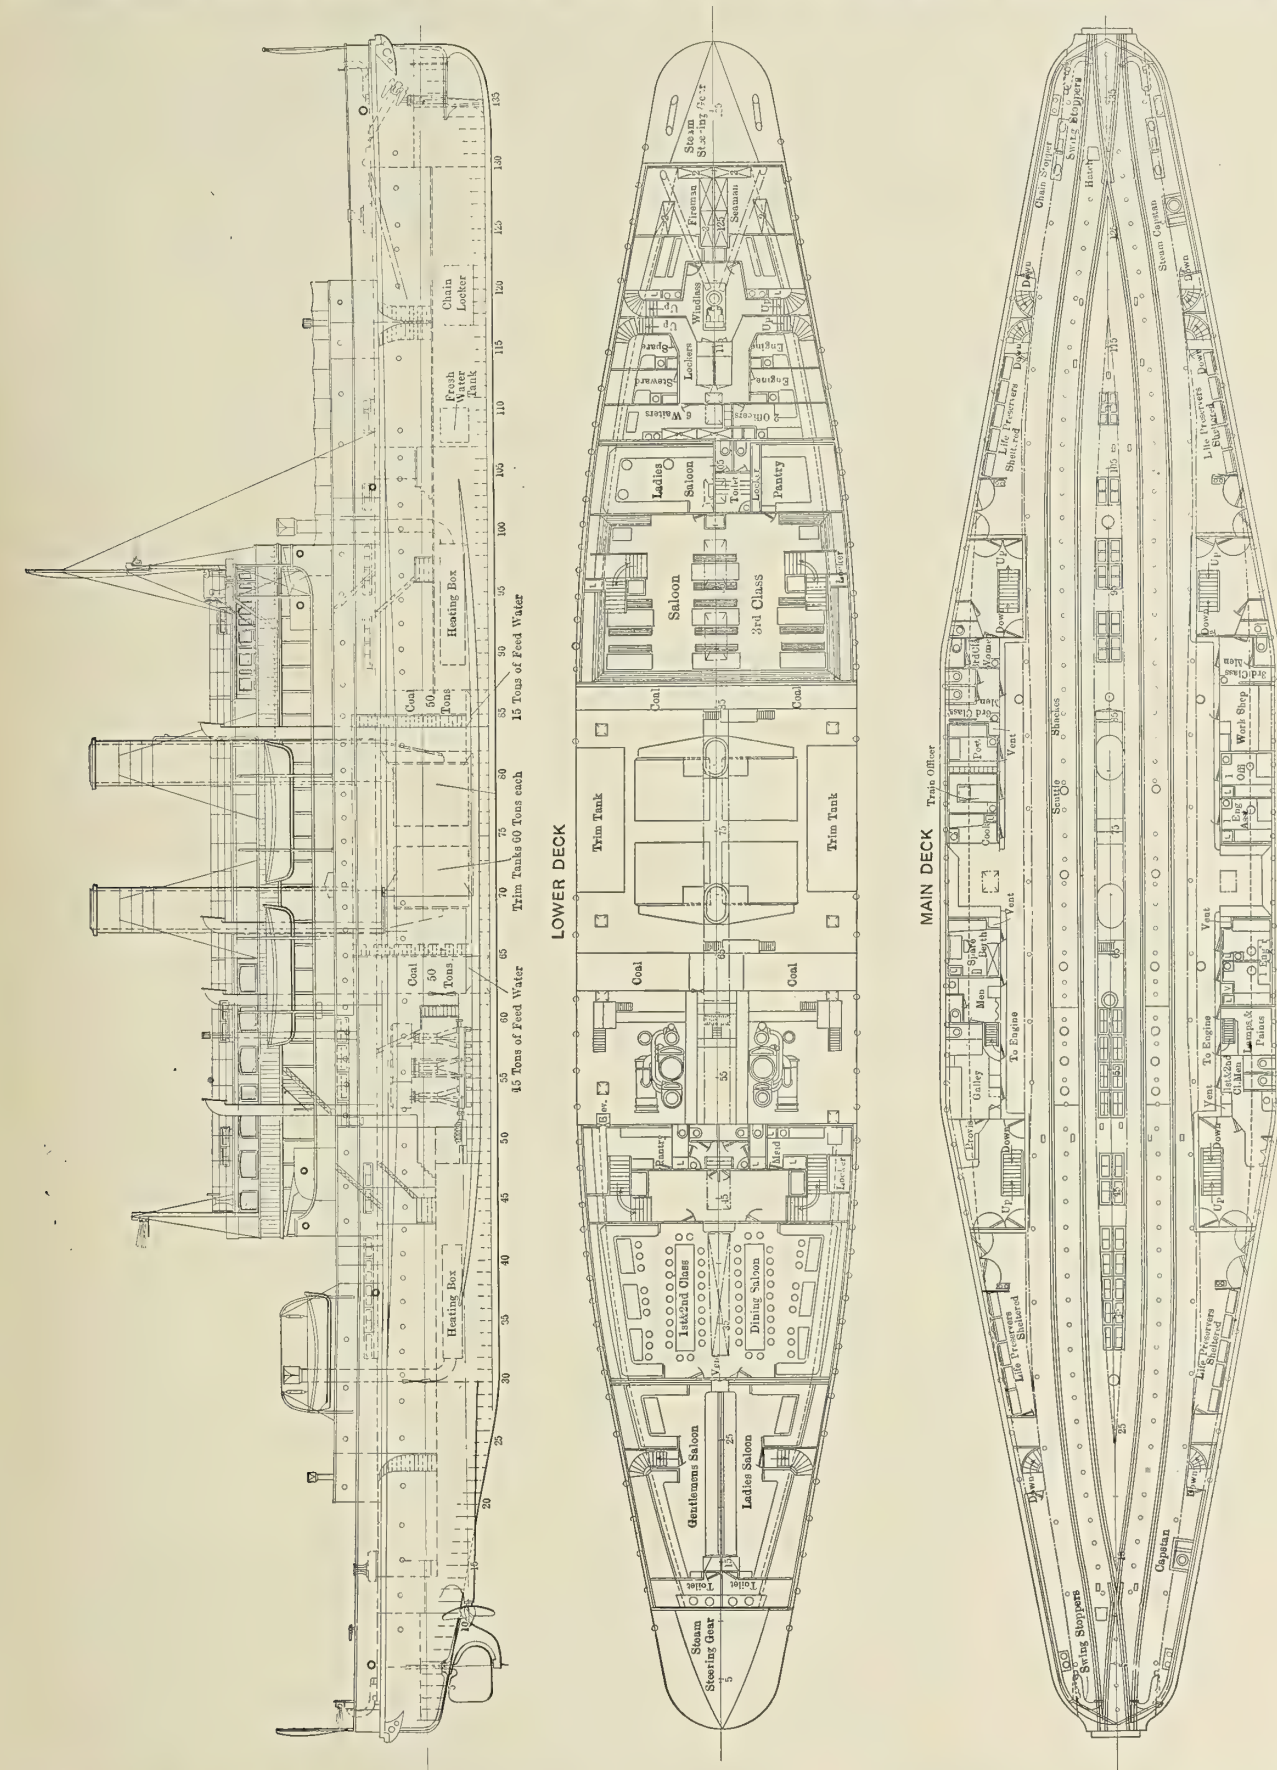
PROFILE AND DECK PLANS OF TWIN-SCREW FERRY CHRISTIAN IX.
